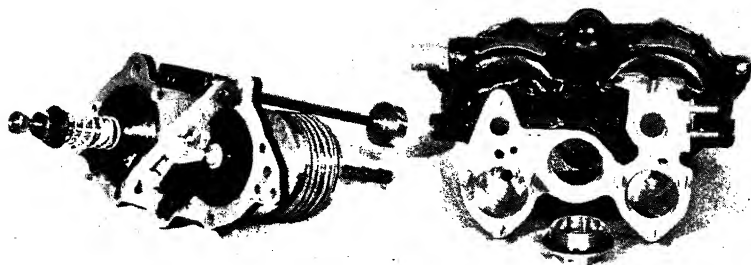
A.—COMBINED BOOST AND AUTOMATIC MIXTURE CONTROL, SHOWING LOWER SIDE OF CASING AND TOP HALF OF UNIT REMOVED
